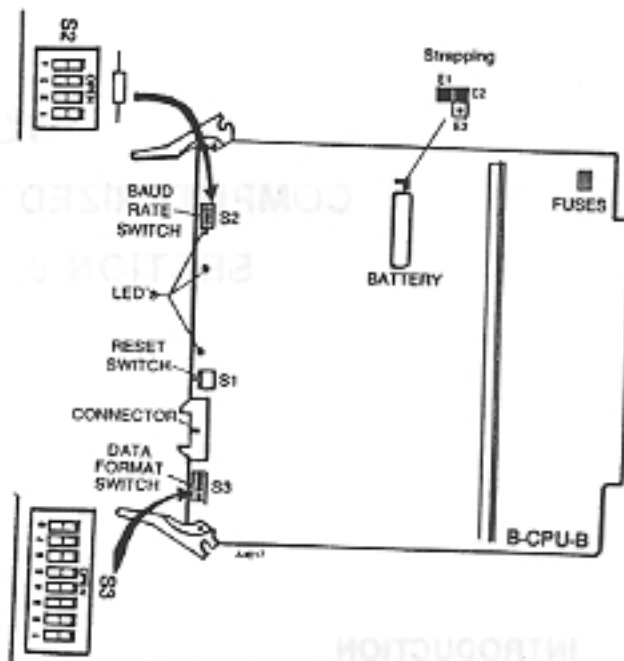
CENTRAL PROCESSING UNIT (B-CPU-B) PCB
